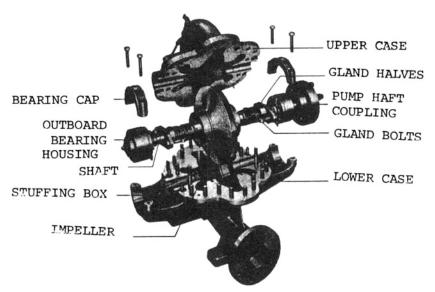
A Horizontal Shaft Single-Stage Centrifugal Pump,
